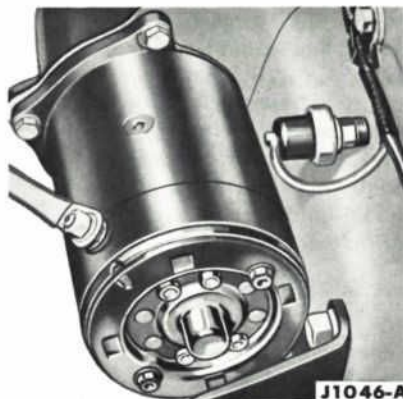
Typical Starter Mounting—Mileage Maker Six
